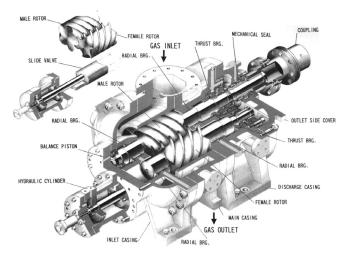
Typical Cutaway of Oil-Flooded Screw Compressor.
